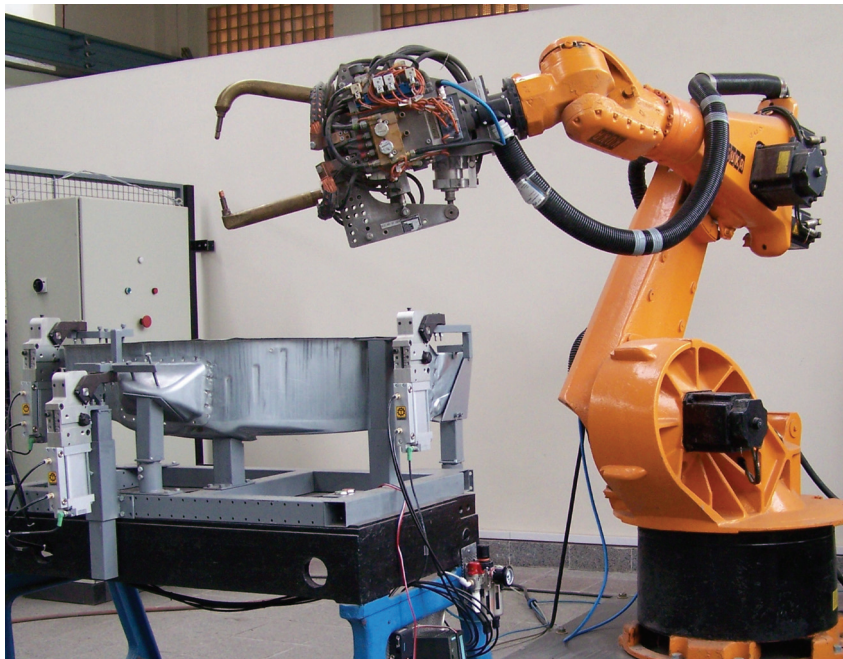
Working station with robot KUKA 125 for spot welding of the inner rear mudguard of cars.
